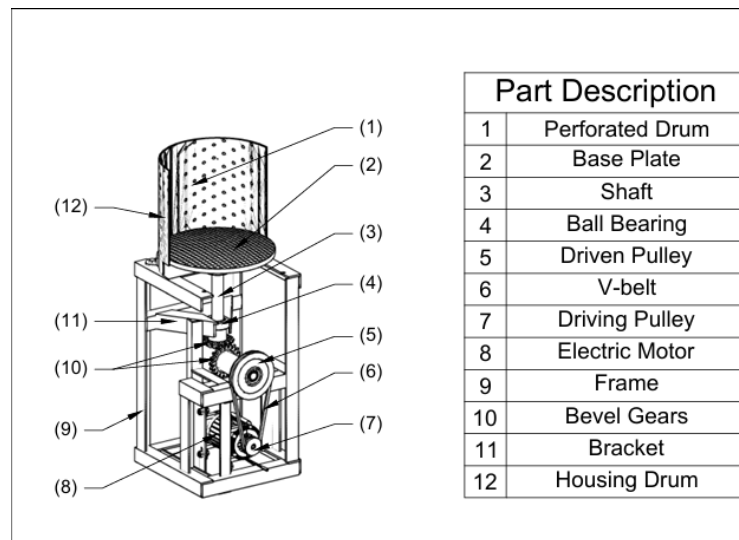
Cassava Peeling Machine (Sectioned and Detailed)
